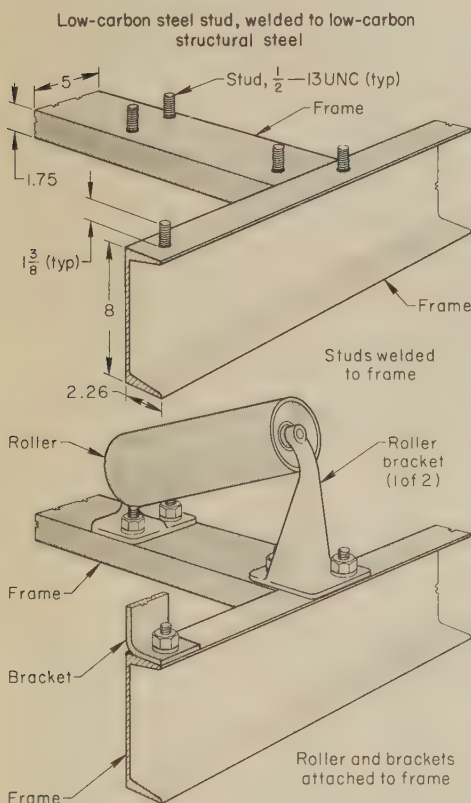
Brackets fastened to a belt-loader frame made of heavy structural sections, using studs rather than through-bolts (Example 168)
